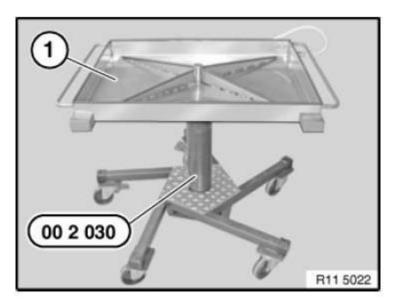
Identifying Drip Tray And Special Tool 00 2 030 (Universal Hydraulic Lifting Equipment) Courtesy of BMW OF NORTH AMERICA, INC.
